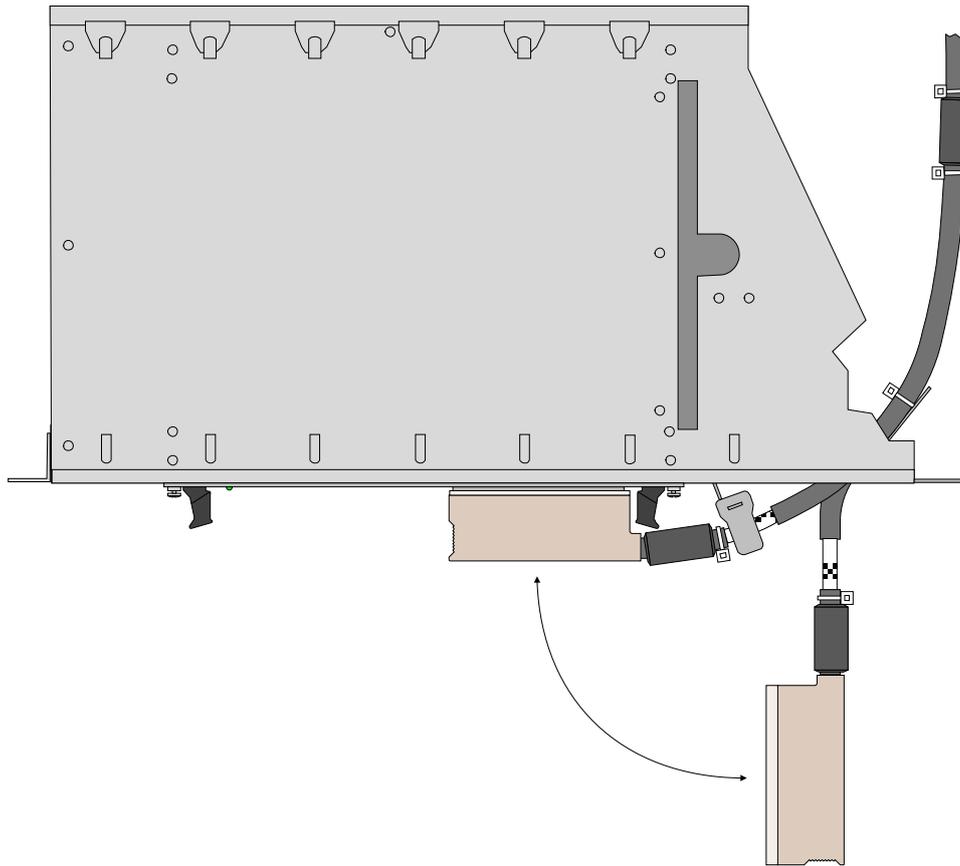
Fixing signal cables in the FOX612 (top view for horizontal mounting)
